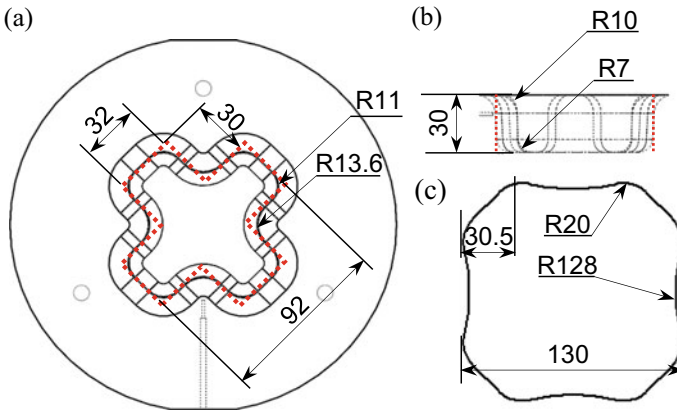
a, b Dimensions of the cross-die and c blank geometry
